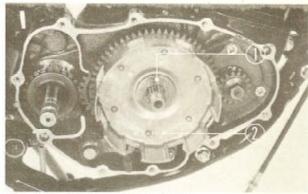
① 20 mm splined washer ② Clutch outer
